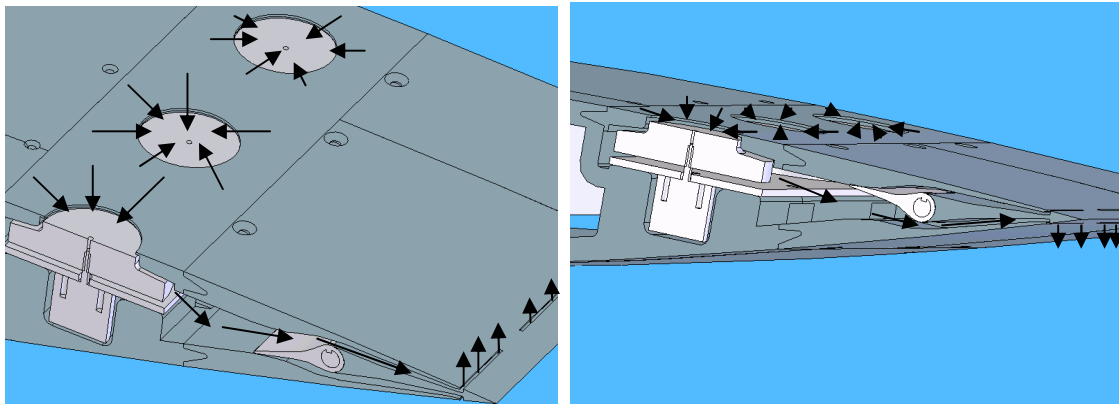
(a) Array of fans mounted on aluminum plate (b) Sectional view showing details of trailing edge actuator.
